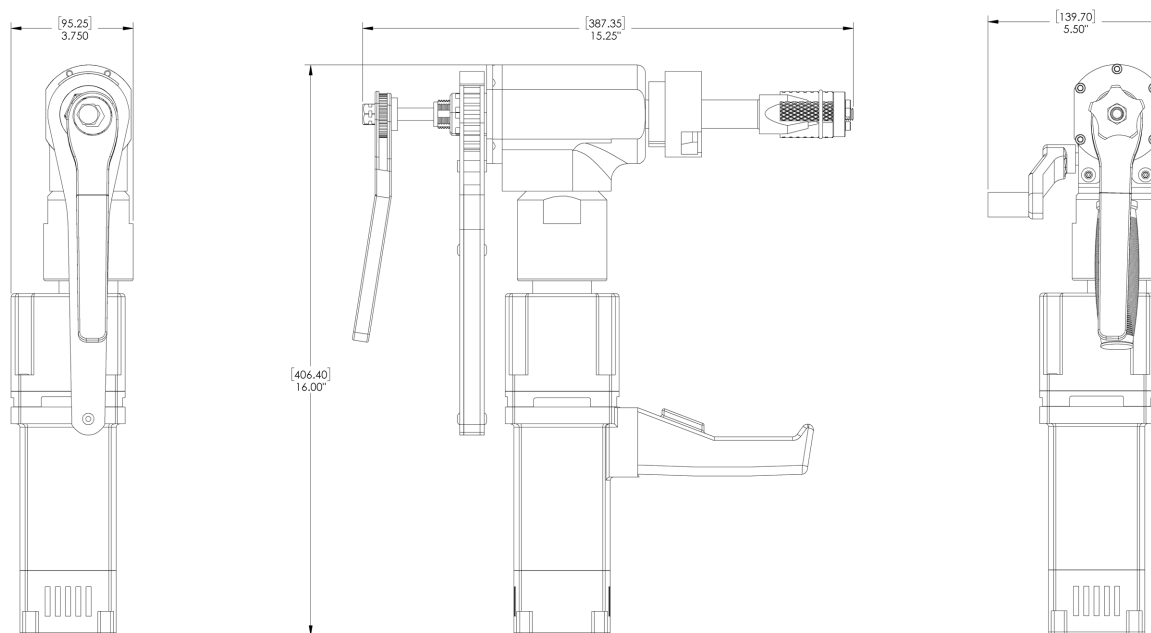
BG44 BOILER GUN ELECTRIC DIMENSIONS
